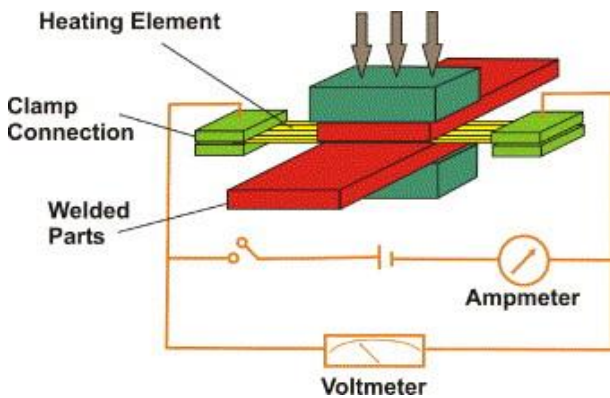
A typical experimental set-up of resistance welding [33].
